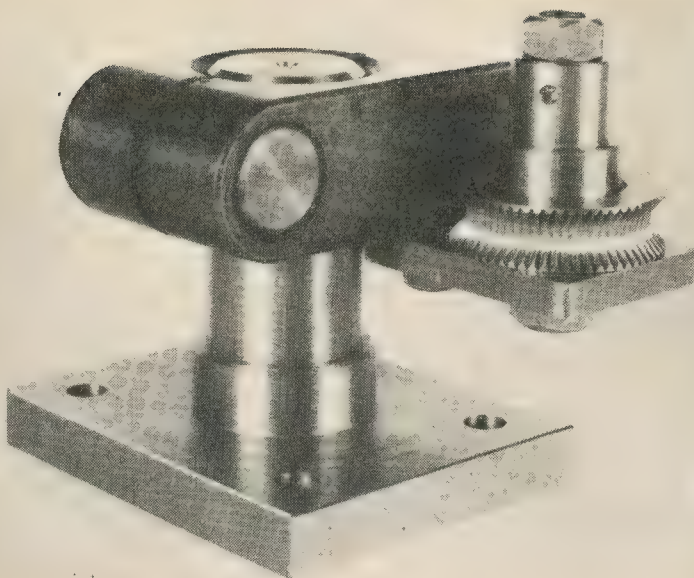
A rigid, adjustable attachment for mounting the blank on the cross-slide
